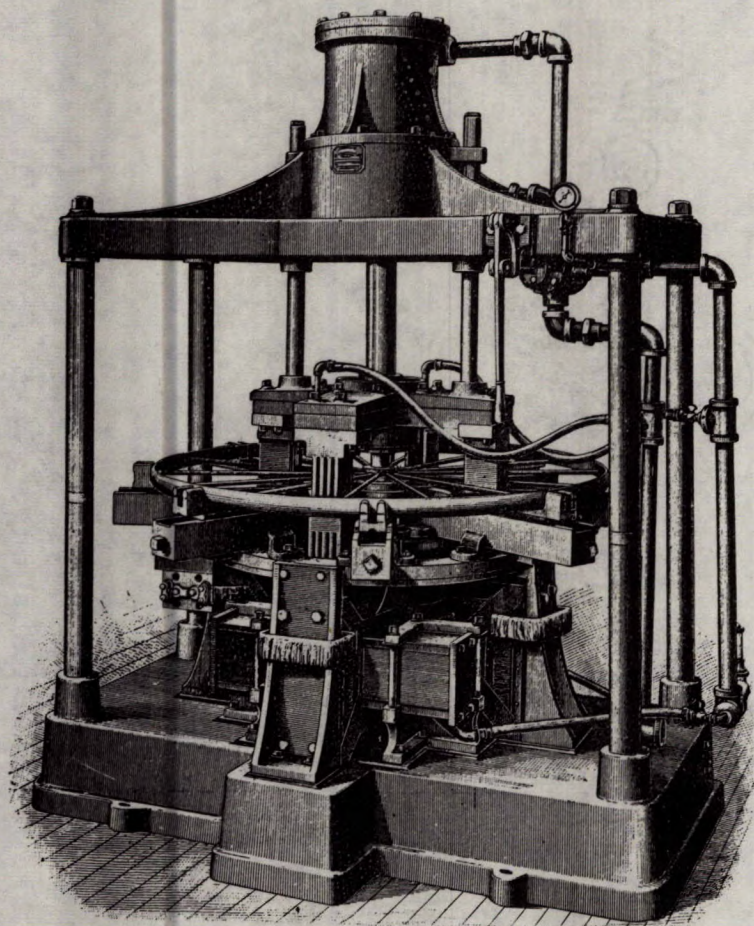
Resistance-welding machine designed by Lemp of Thomson Electric Welding Co. to make spoked wheels for wheelbarrows and farm vehicles, 1896 A.D. (Reference 29, p.105)
